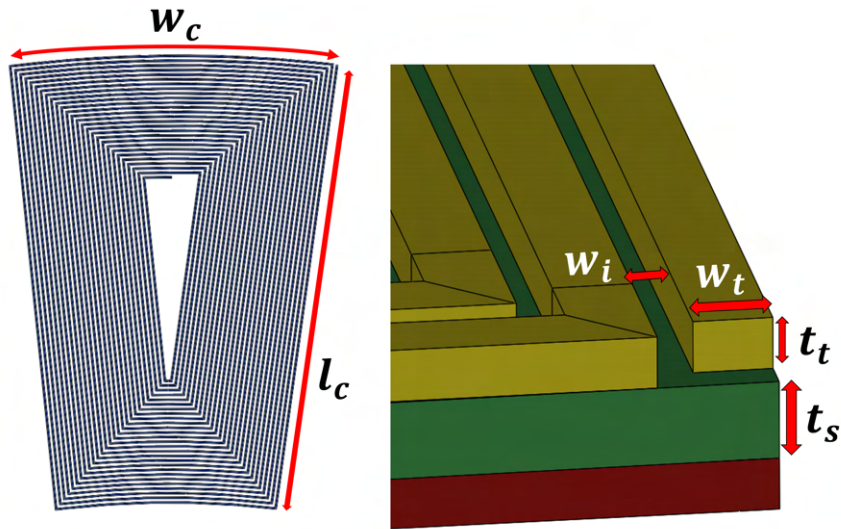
Main geometric variables for PCB stators in coreless machines. The coil shown has a spiral pattern and connects to internal layers using vias. The number of coils per PCB is the same as the number of PM poles.
